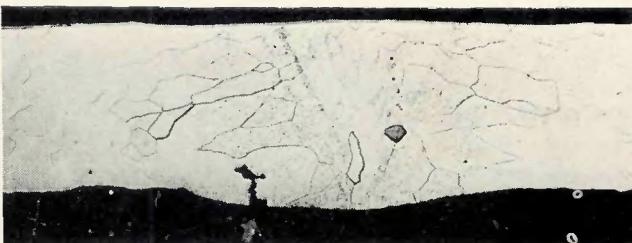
Transverse section of gas tungsten-arc weld in 0.06 in. thick ultrahigh-purity aluminum showing crack-like defect associated with insufficient joint cleaning at lower left of fusion zone. 20% HF etchant. X20 (reduced 33% on reproduction)
